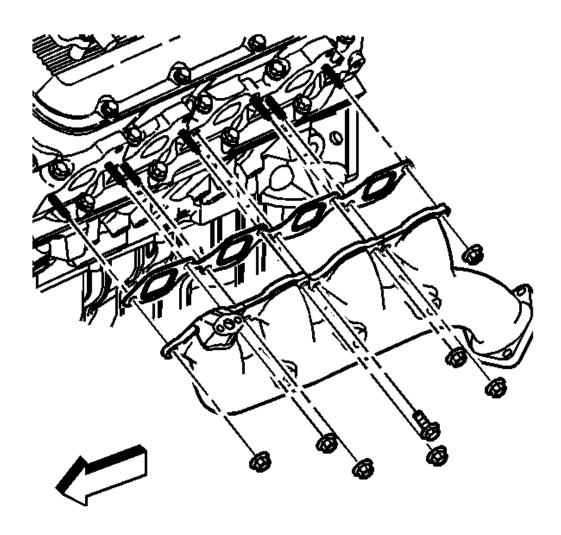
View Of Left Exhaust Manifold, Gasket, Bolts And Nuts Courtesy of GENERAL MOTORS CORP.
